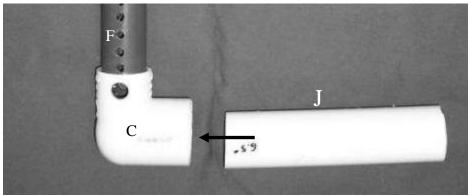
Assembly of the Medium/Large Wheelchair (Step 15).
